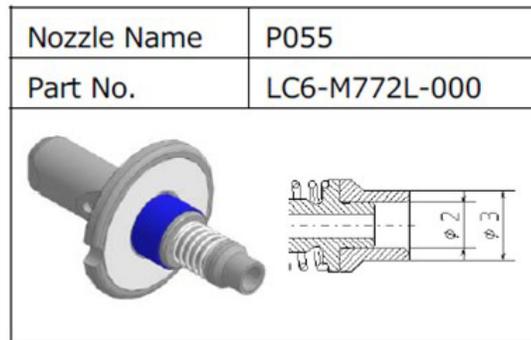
Example of a nozzle that fits Yamaha i-PULSE series pick and place machine.
